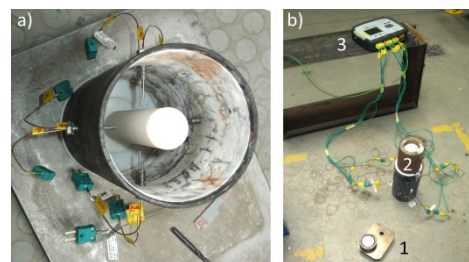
The mould prepared to be filled with gypsum - a), test stand after the mould cavity was filled - b), where: 1 - sample for chemical composition test, 2 - extra level, 3 - recorder
